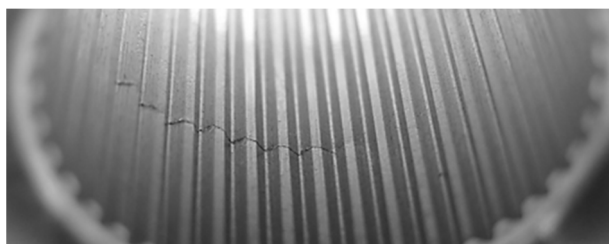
Bearing flange damage 569 841 cycles
